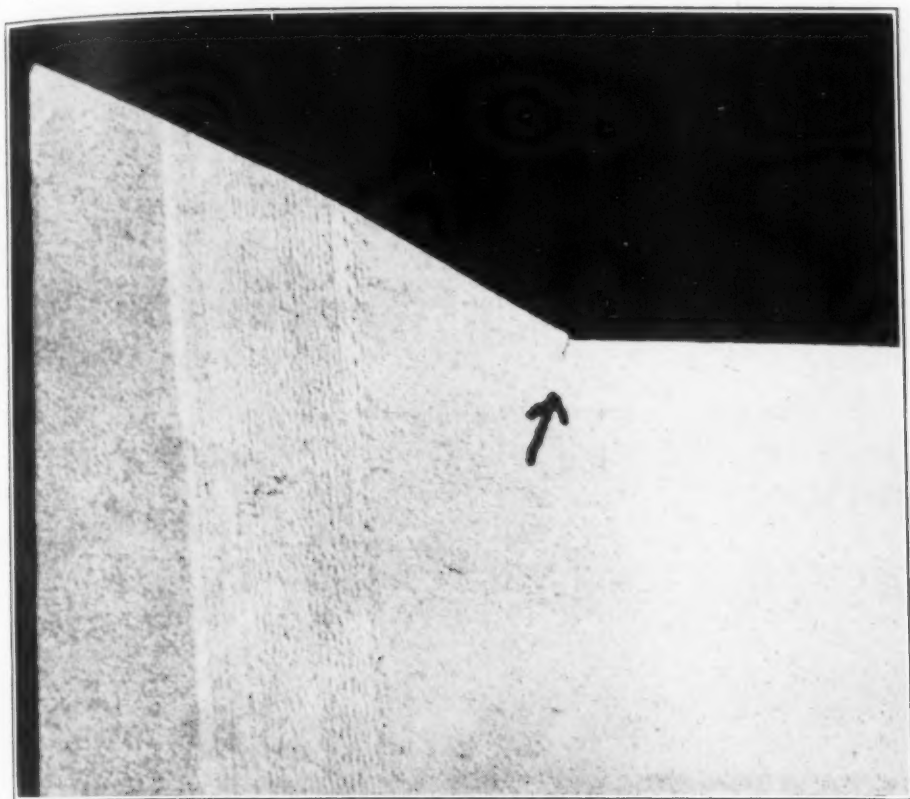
Section of Propeller Hub Showing Origin of Fatigue Failure. (Slightly Reduced.)
